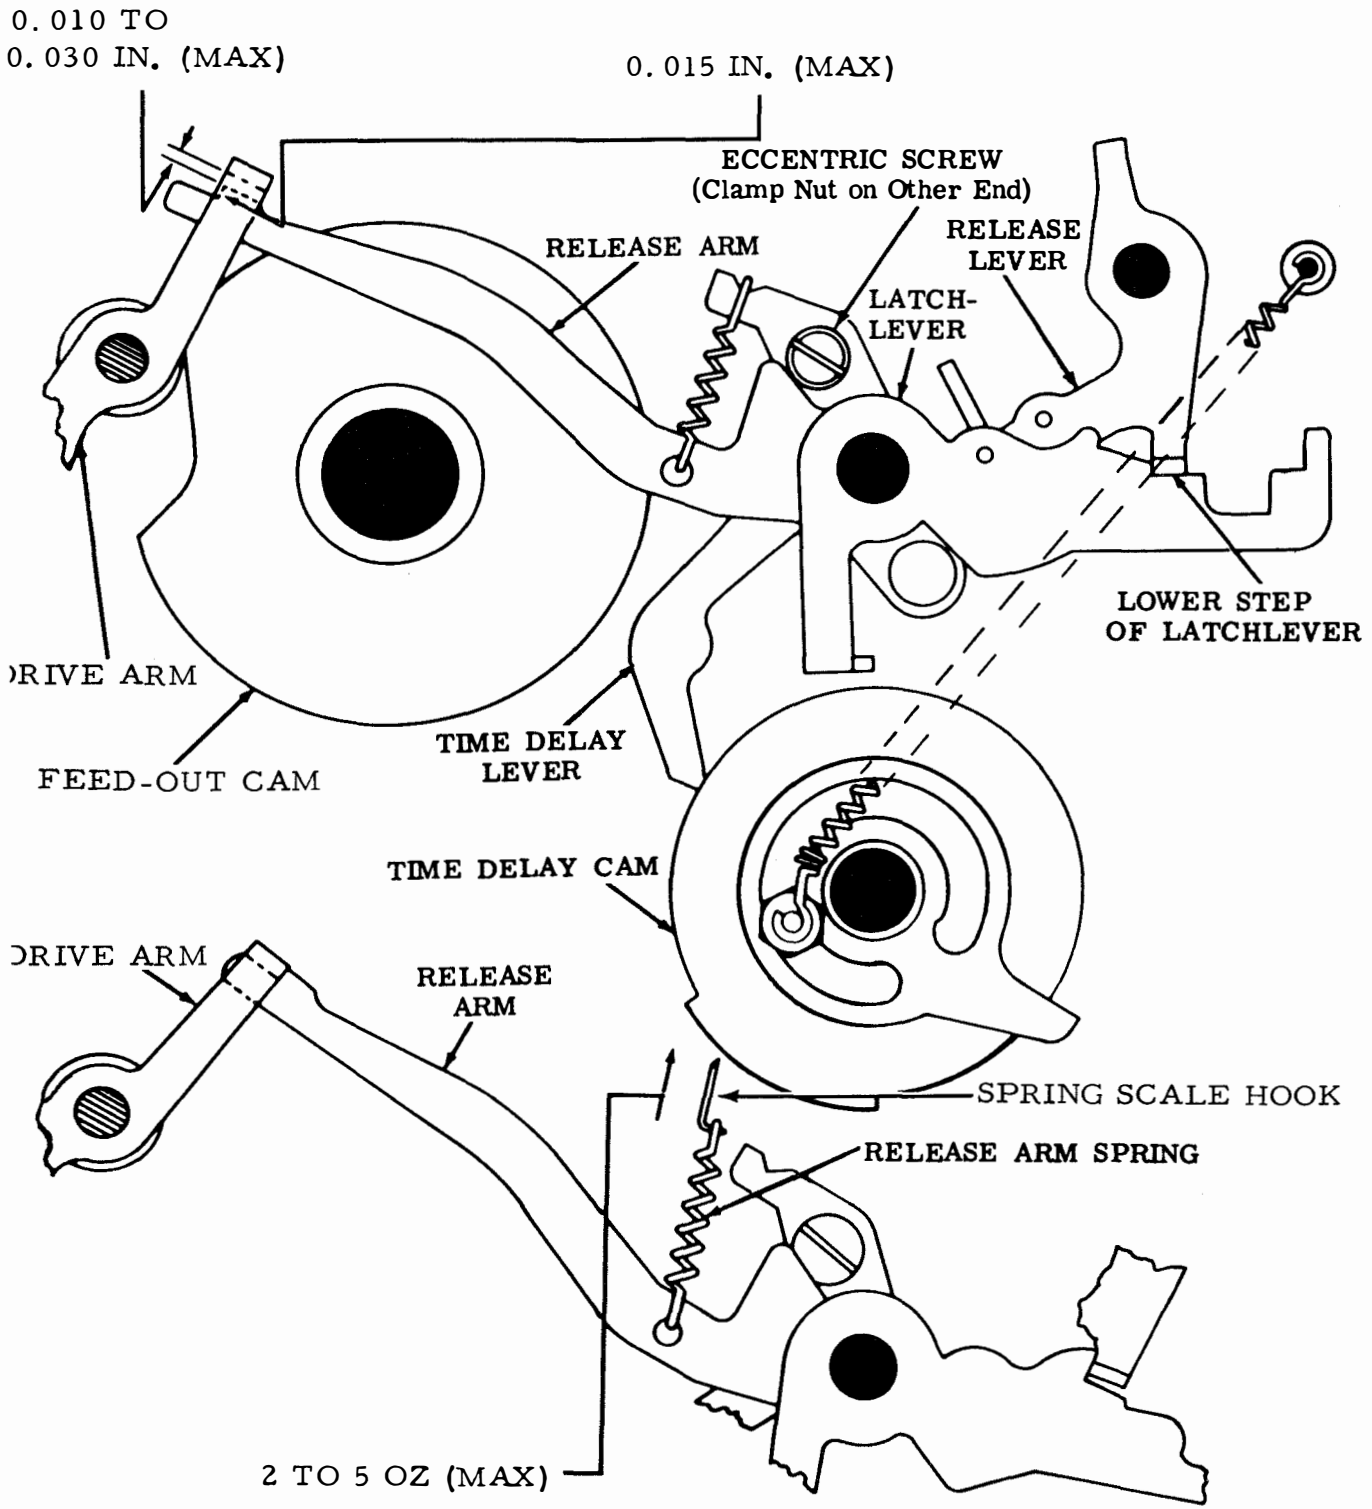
Release Arm and Release Arm Spring, Reperforator, Front View
